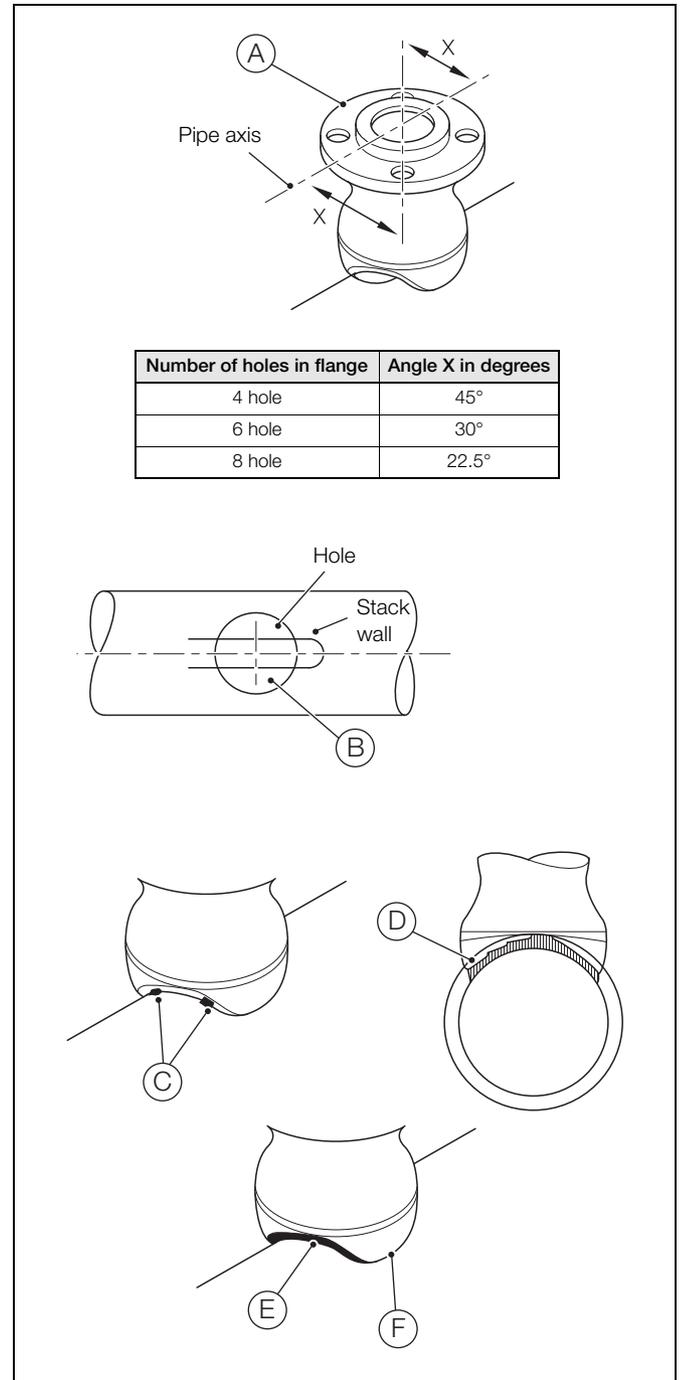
Flanged pipe fitting (stand-off) installation
